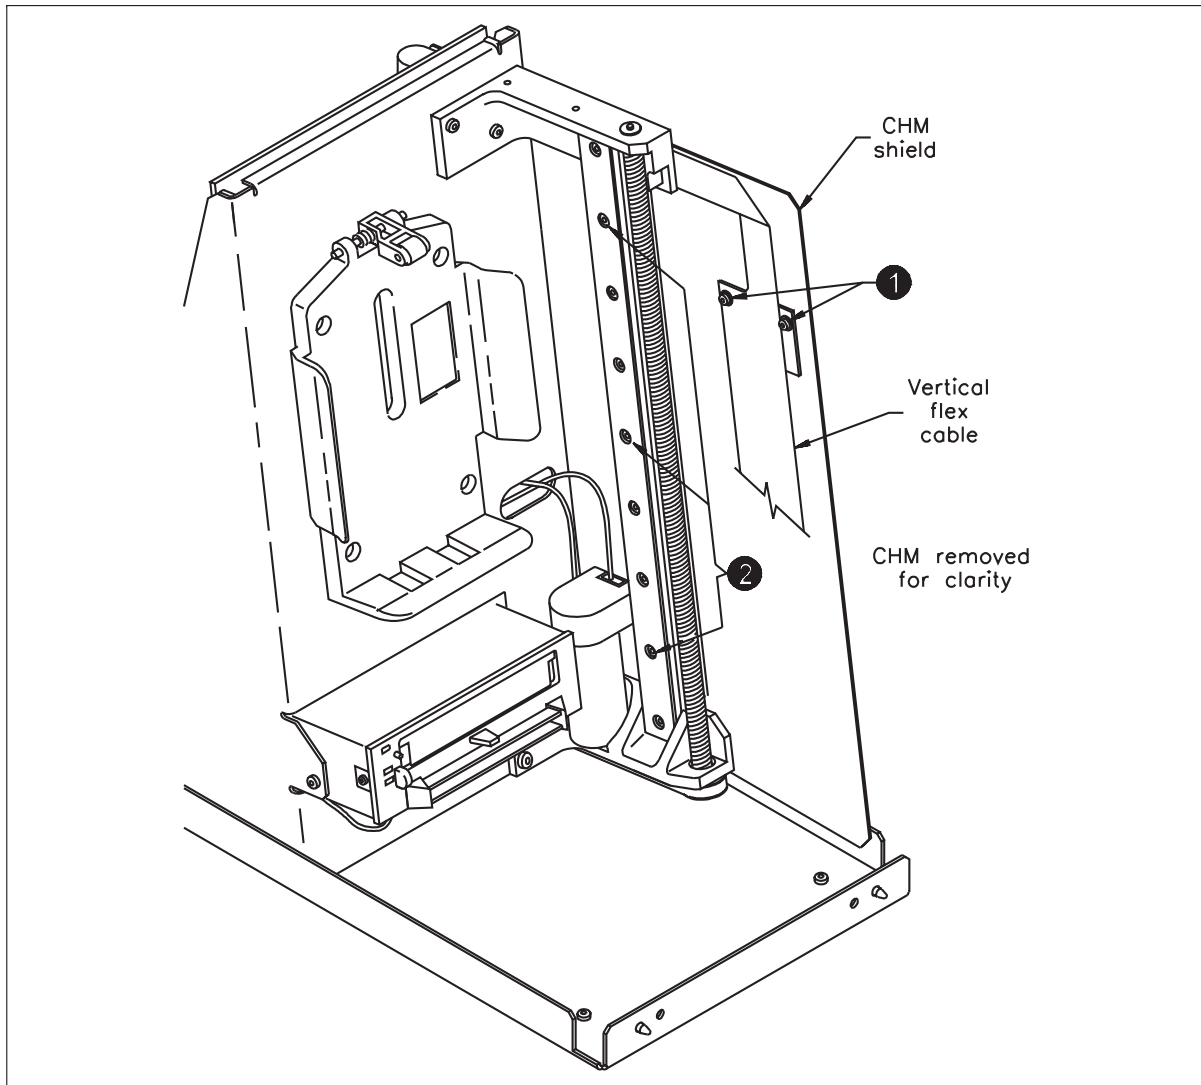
Removing the CHM shield (parts of CHM removed for clarity)
